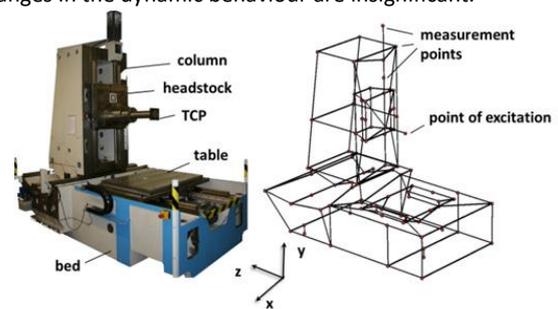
Wire frame model of 3-axis machine tool [Putz 2016].
